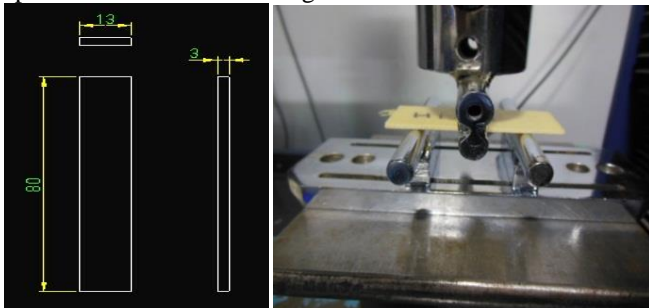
Flexural Test Specimen Dimensions and Flexural Testing of Specimen
